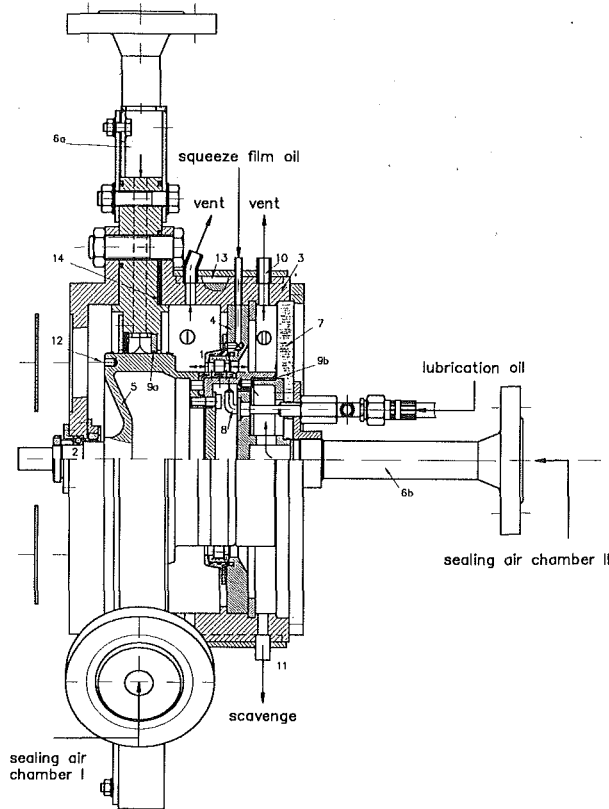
Compact high-speed bearing chamber: (1) roller bearing, (2) axial fixed ball bearing, (3) housing, (4) roller bearing support unit (flange), (5) rotor, (6a) sealing air supply chamber I, (6b) sealing air supply chamber II, (7) transparent cover, (8) under race lubrication, (9) labyrinth seal, (10) vent, (11) scavenge, (12) balancing hole, (13) cooling duct, (14) insulation
